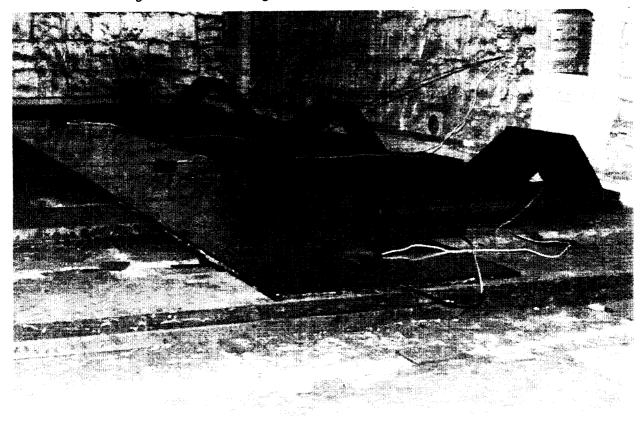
Flattening Retort Containing Perforated Skin Ready for Furnace Cycle
